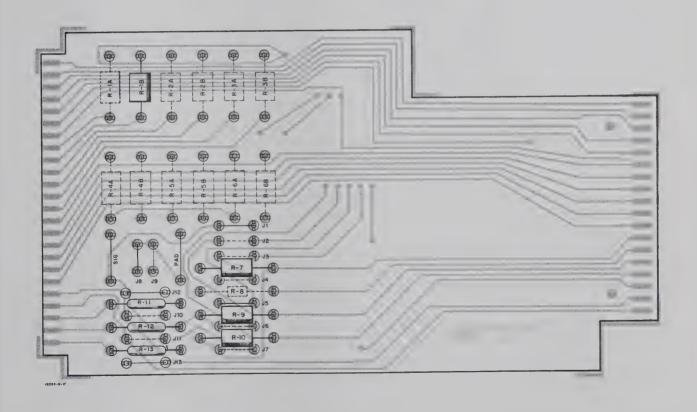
Single Active-Arm, Linear Mode: Circuit and Resistor Board Loading
